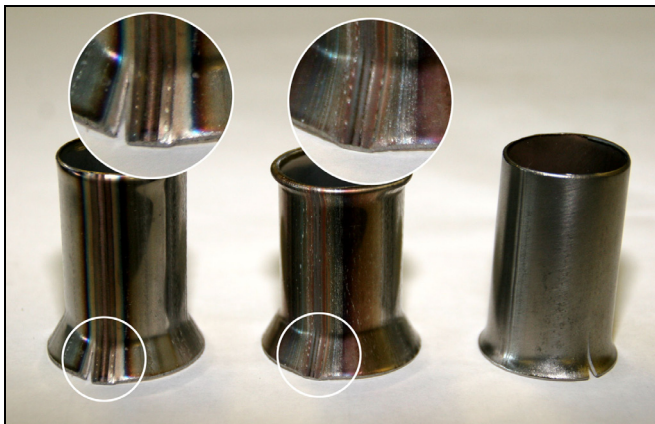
Typical ASTM A513 ring flare-test tube specimens. From left: as welded; cooling-controlled; C.C. Q+T hardened.
